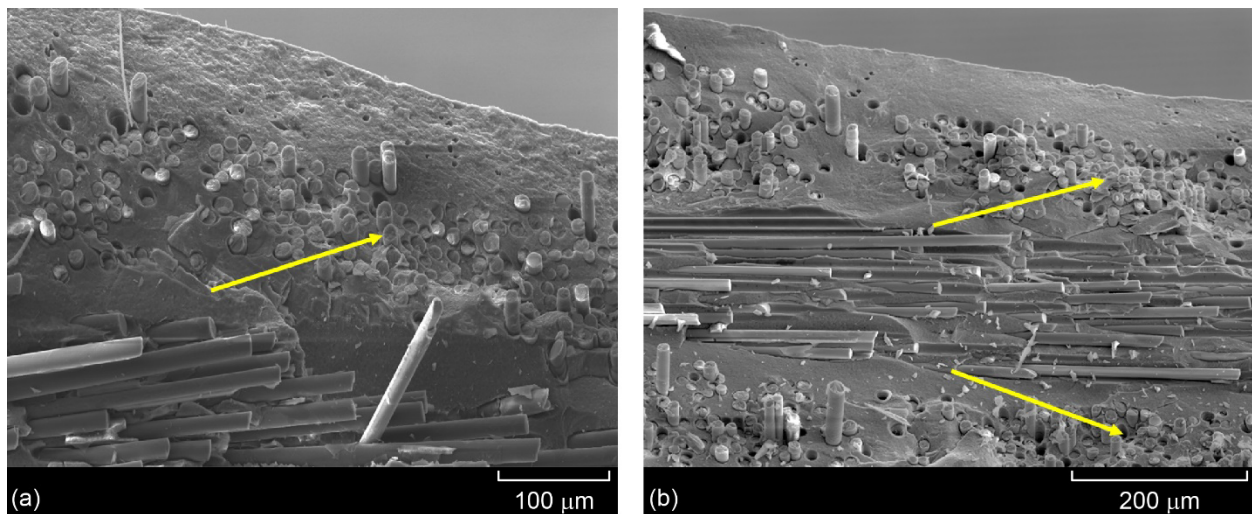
Fracture surfaces of CMC specimens without holes tested in HCF at 816 °C. (a) Gross-section maximum stress, 317 MPa; 19 h to failure. (b) Gross-section maximum stress, 359 MPa; 4.3 h to failure.
